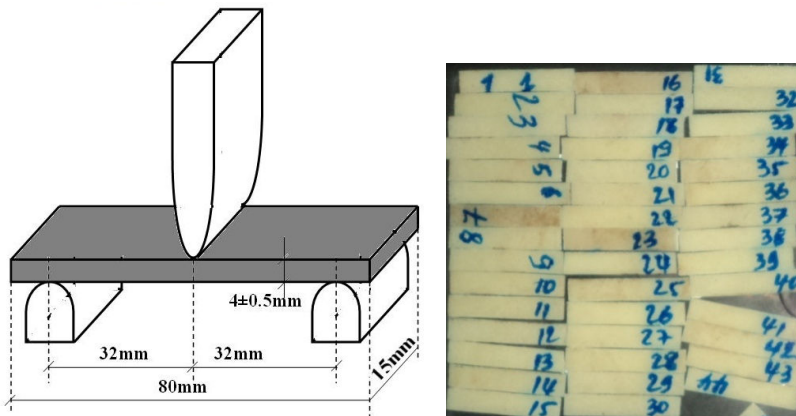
Dimension specimen glass/polyester test in fatigue loading.
